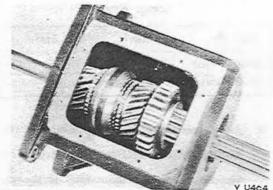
Seating the spline shaft with attached parts in the transmission case.
